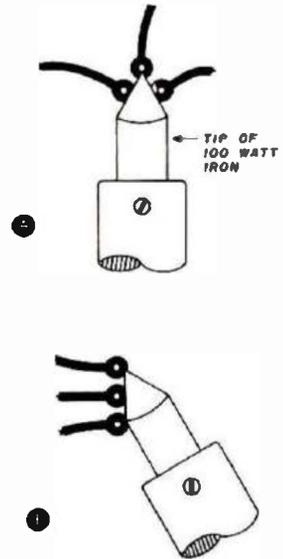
Position of soldering-iron tip to heat PC board pads to remove a TO-5 transistor, A, and for in-line leads such as a TO-92 transistor, B.
